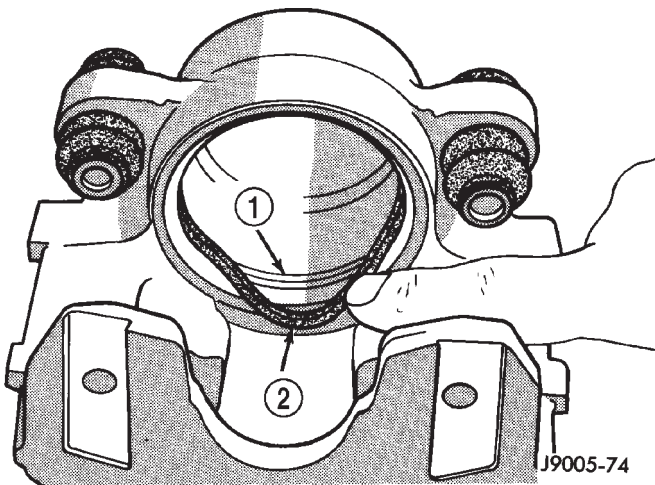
PISTON SEAL INSTALLATION - TYPICAL
